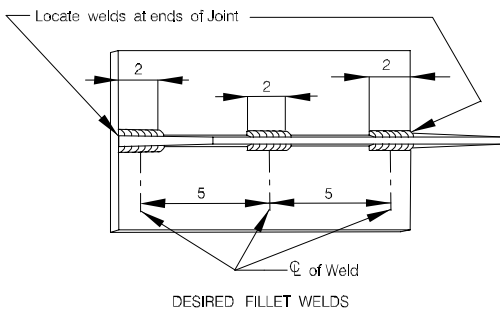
Application of Symbols – Fillet Welds
